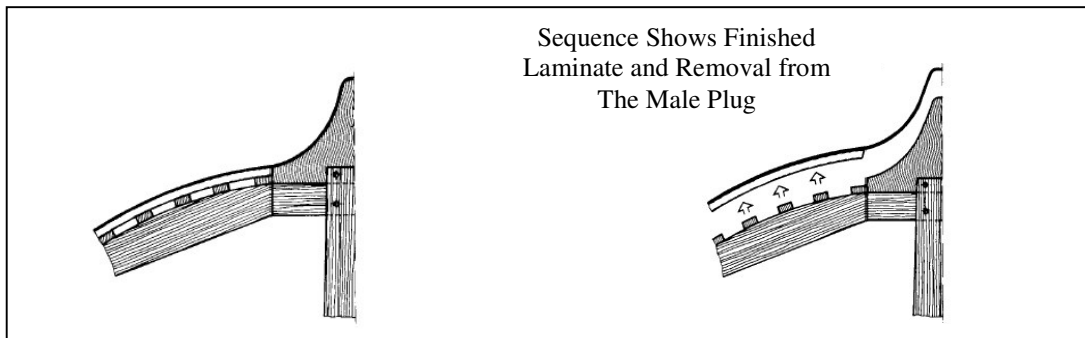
Detail of Sandwich Construction over Male Plug (Greene 2004)
